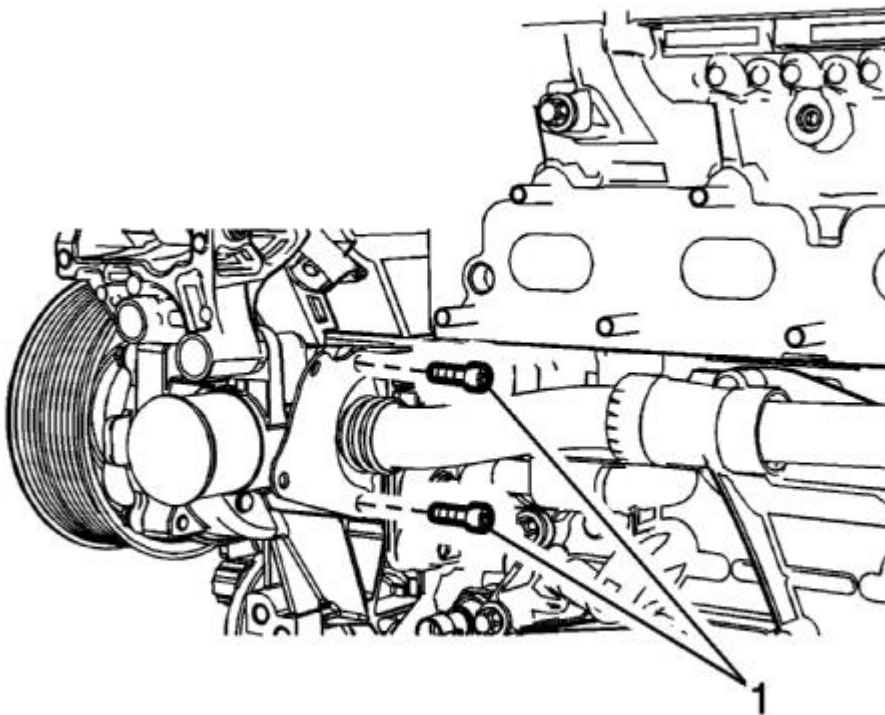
Engine Oil Cooler Outlet Pipe Bolt
